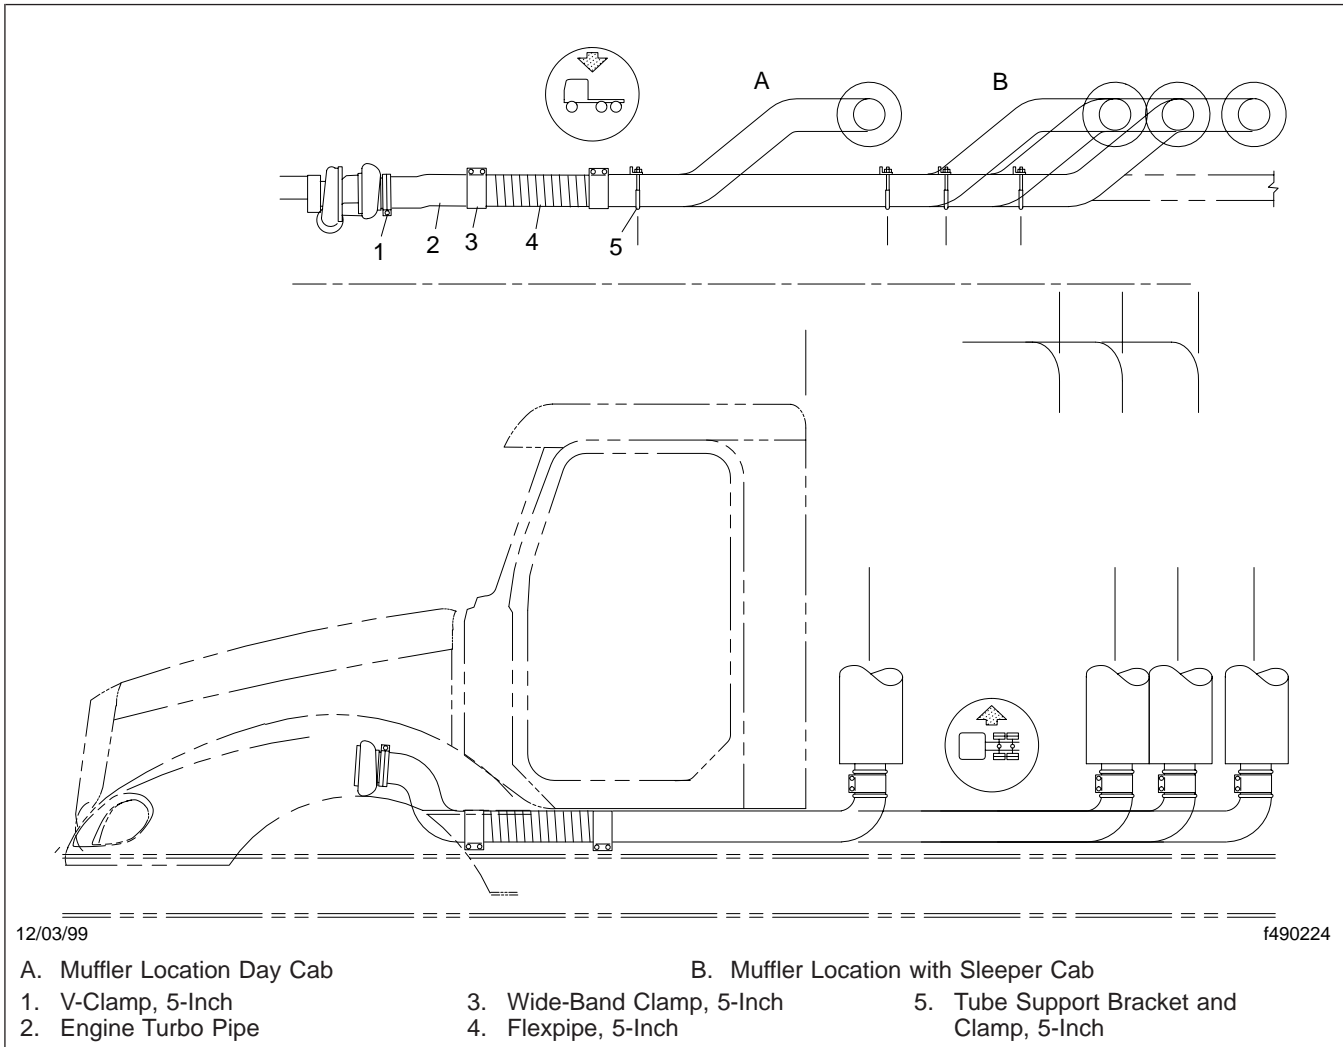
, Exhaust Piping for Single Stationary Outboard-Mounted Muffler
